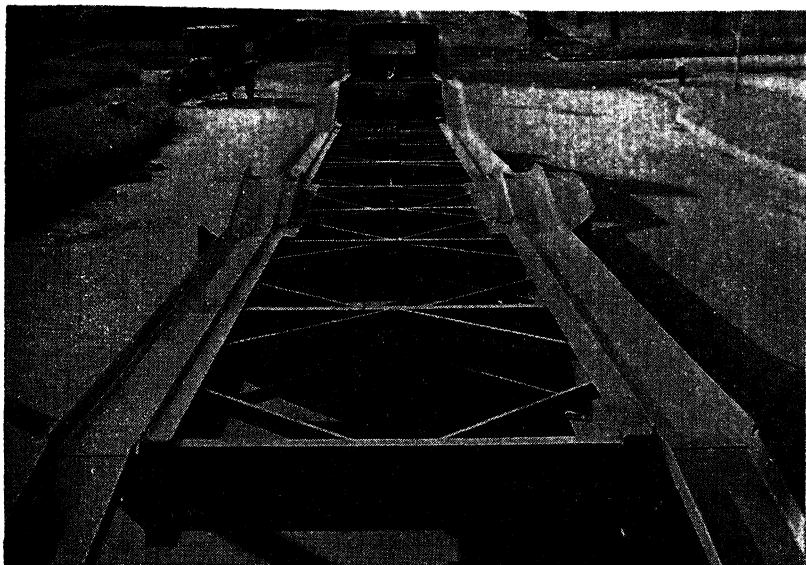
Arc welding is used extensively to build automobile carriers—both the type shown and the double deck type.
